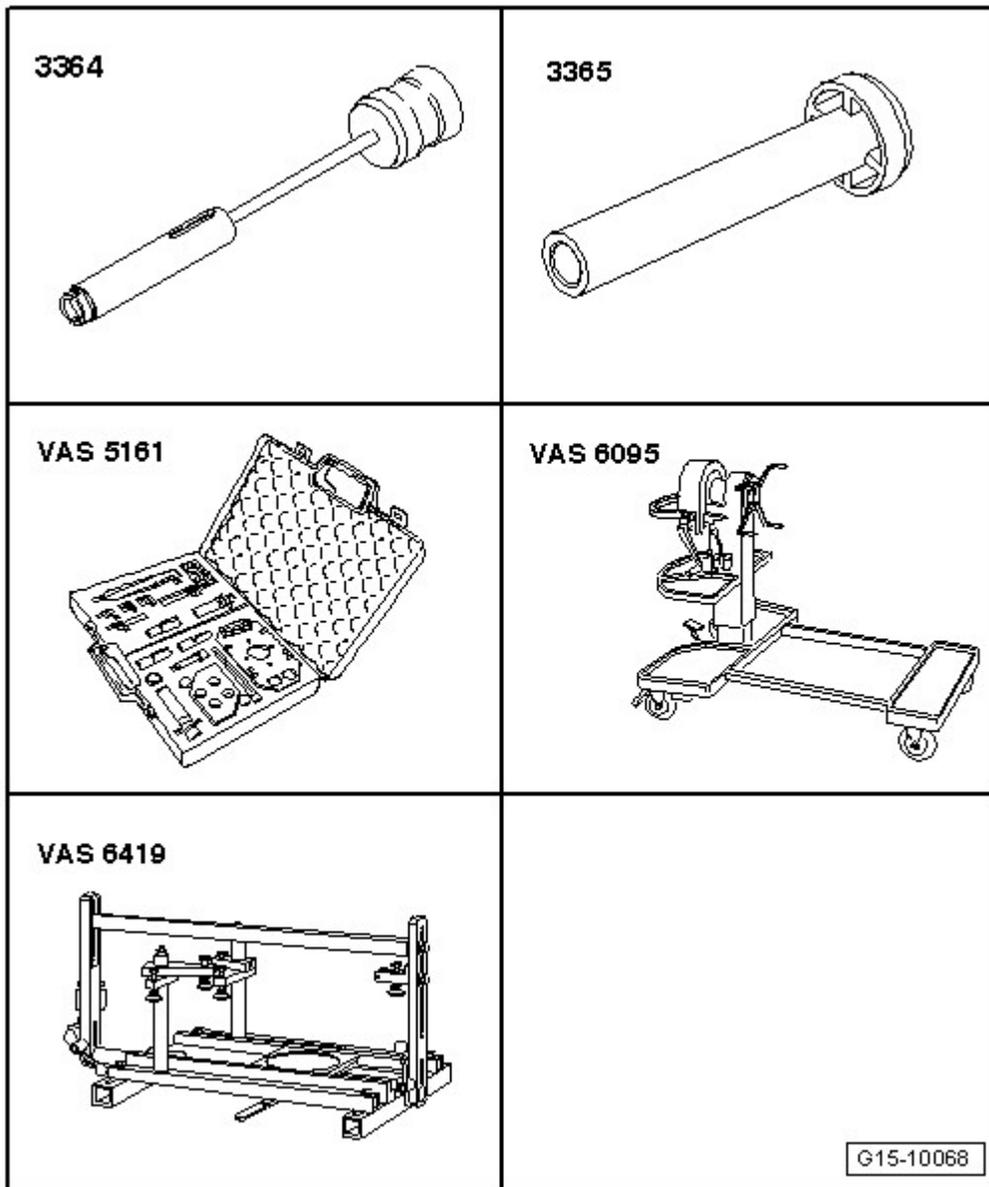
Special Tools And Workshop Equipment (4 Of 4)
